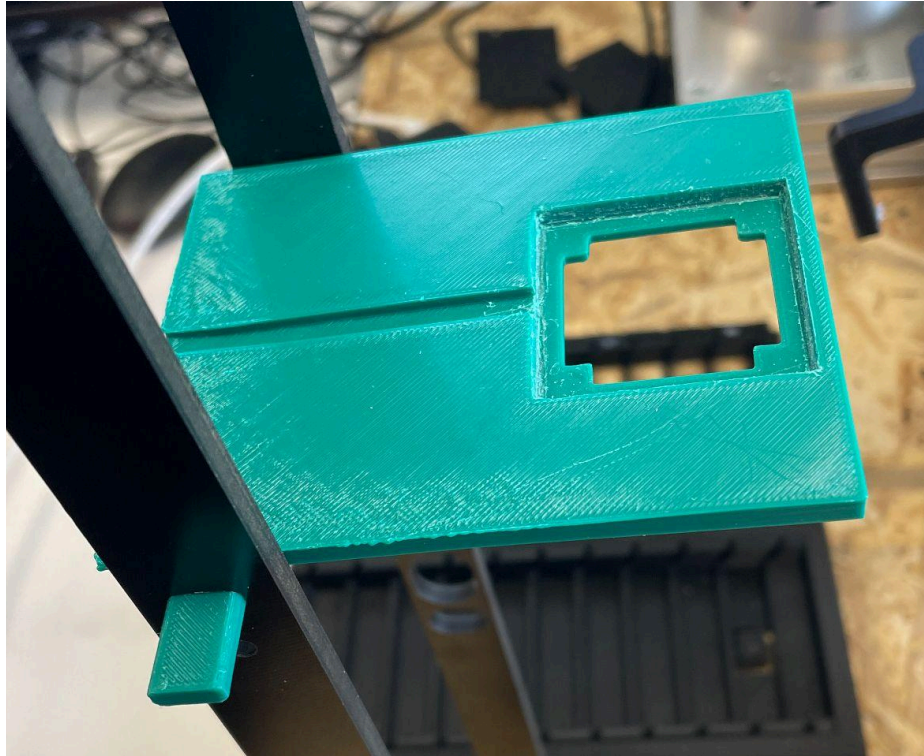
3D-printed camera holder mounted above the PCB pickup area.
